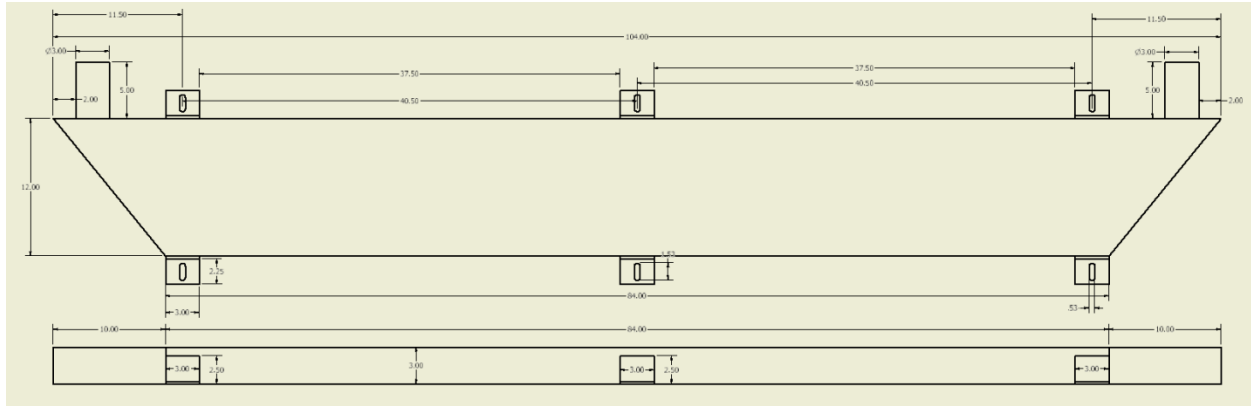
Figure showing schematic with dimensions in inches of steel test section
